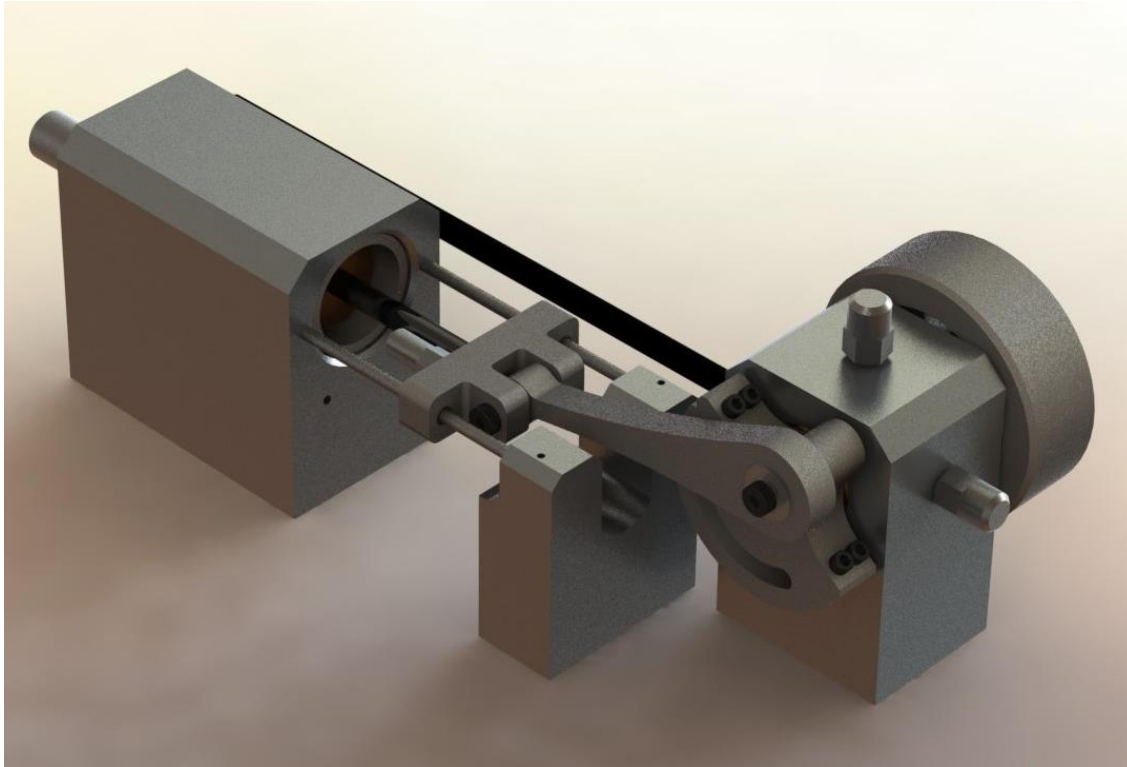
Isometric View Solid Model of Slider Crank Mechanism
